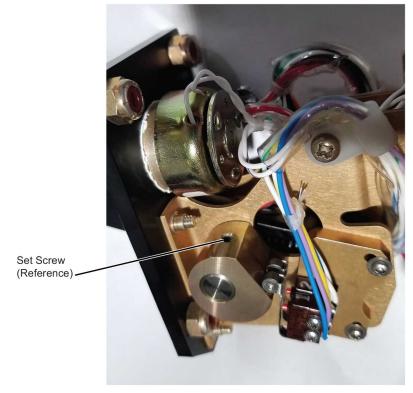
Landing Gear Control Switch Inspection (Sheet 1)
